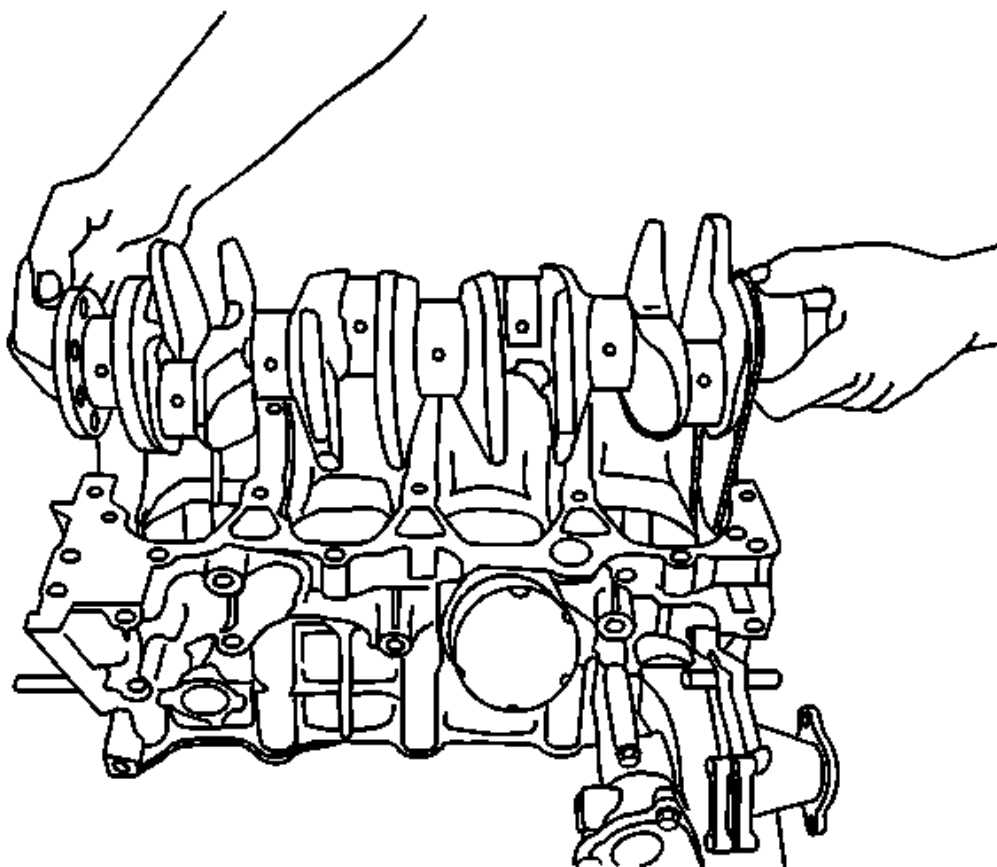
Removing Crankshaft & Oil Pump Drive Chain From Cylinder Block
